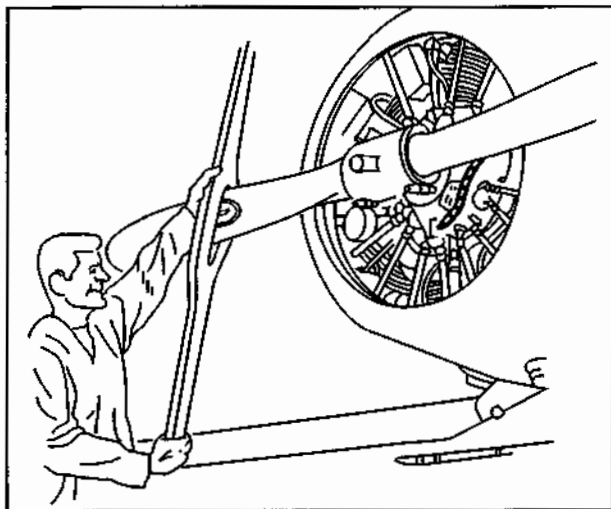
A propeller blade paddle is used to adjust blade angles.
